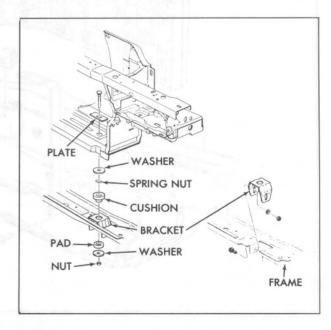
Radiator Cradle Mounts—Eldorado
